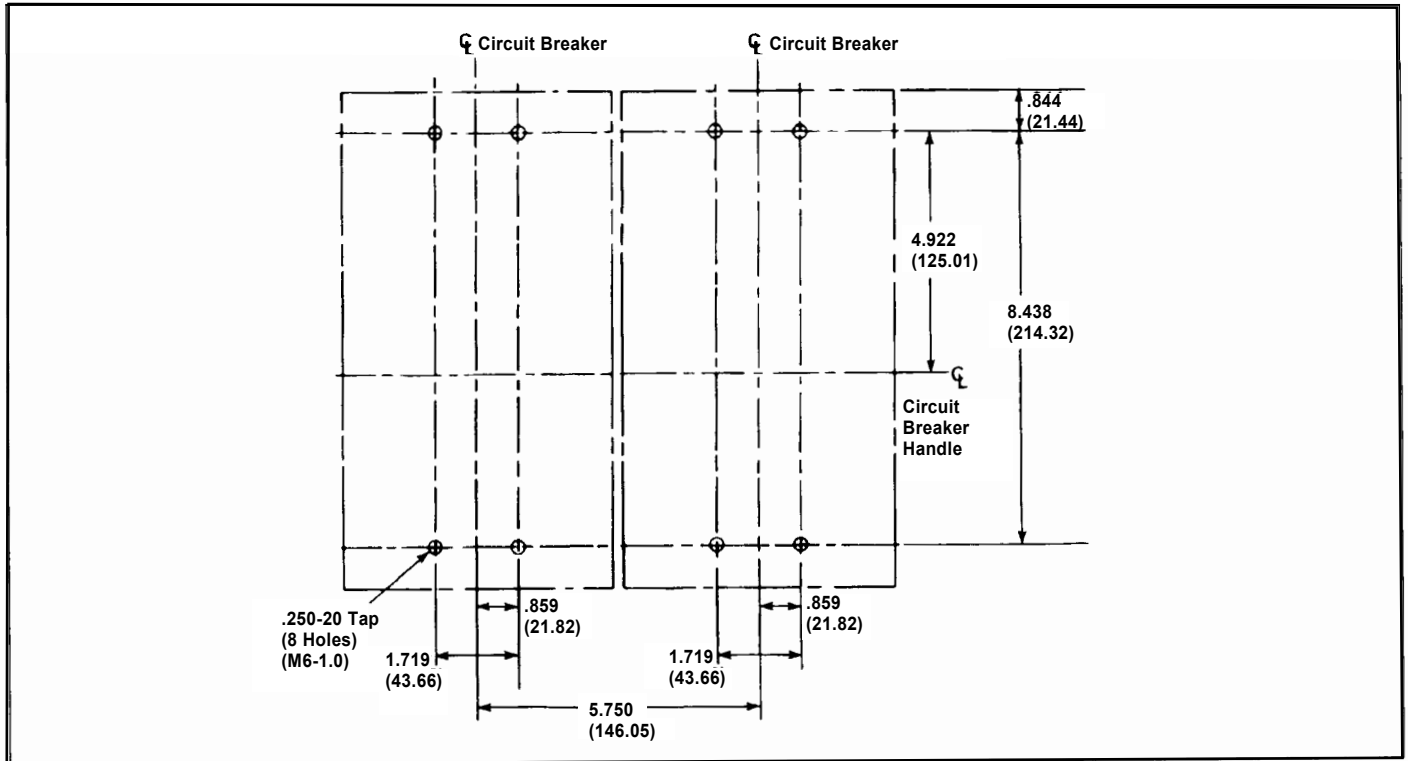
K-Frame Circuit Breaker Mounting Bolt Drilling Plan.
